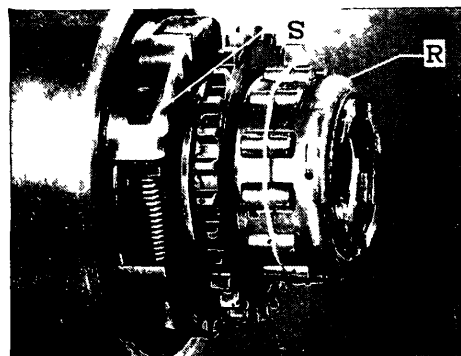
Using tight-fitting rubber band to hold free wheel rollers in place when installing case. S. Pawl adjusting screw. R. Free wheel cam
